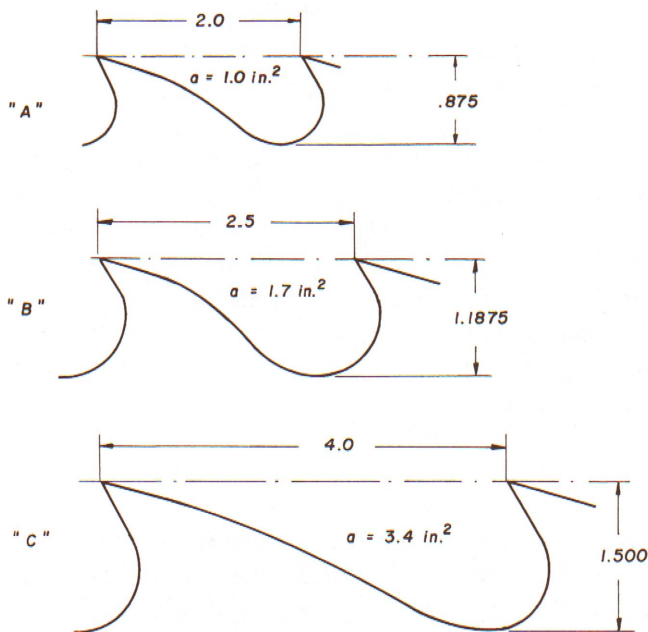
Gullet space and tooth dimensions of selected band saws "A", "B", and "C".
